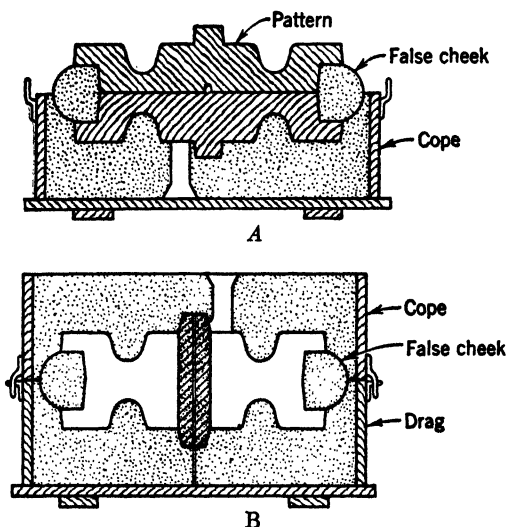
A. In molding a flanged pulley in a two-part mold, a false cheek is formed between the flanges of the pattern. B. Completed mold of a flanged pulley made in a two-part mold.
